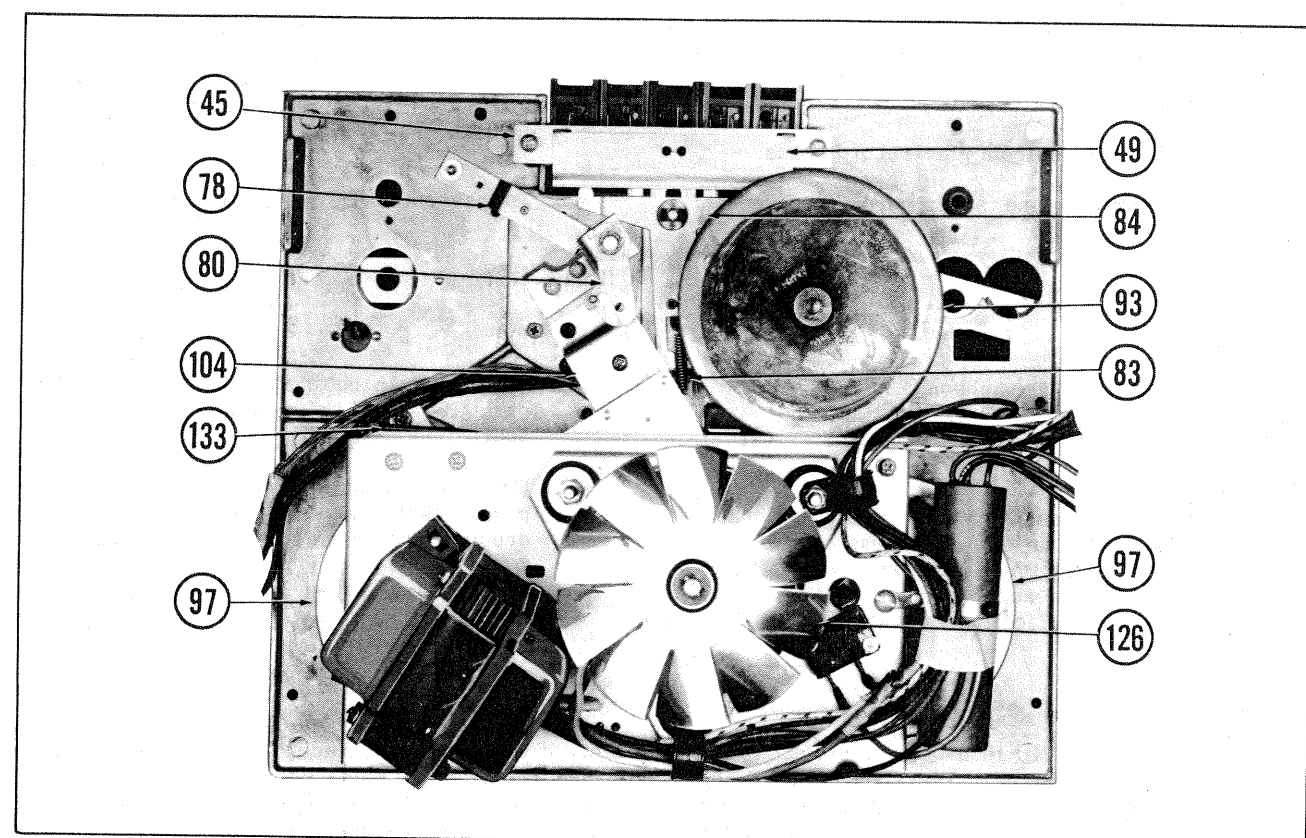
BOTTOM VIEW OF MECHANISM WITH AMPLIFIER REMOVED
